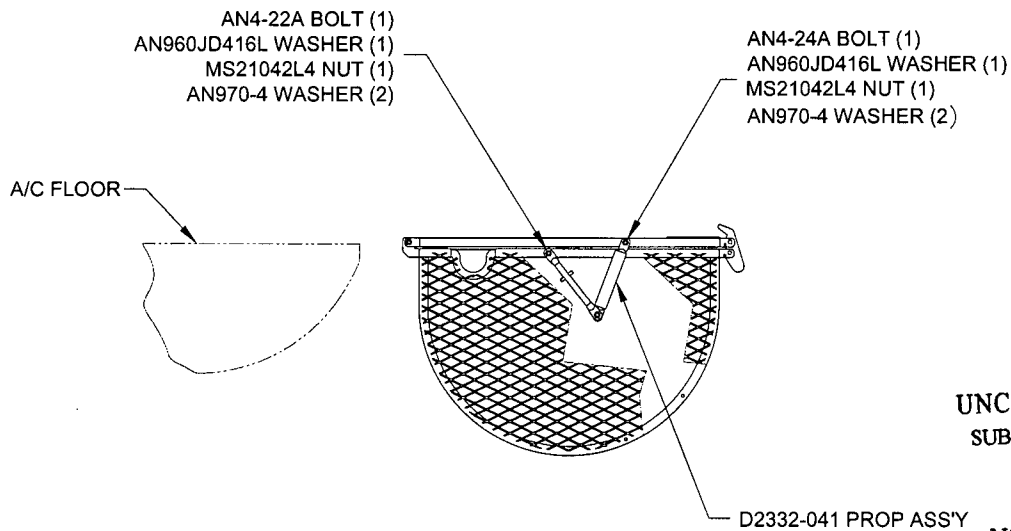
Section C-C Looking Fwd at STA 155.06
